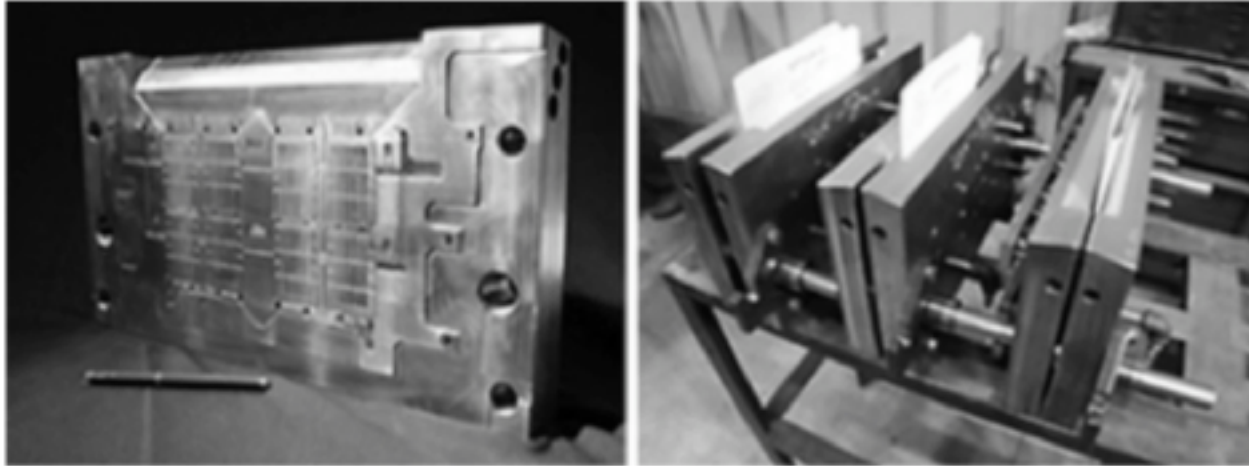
Battery grid casting mold (book mold). (From Wirtz Manufacturing. Available at <http://www.wirtzusa.com>.)
